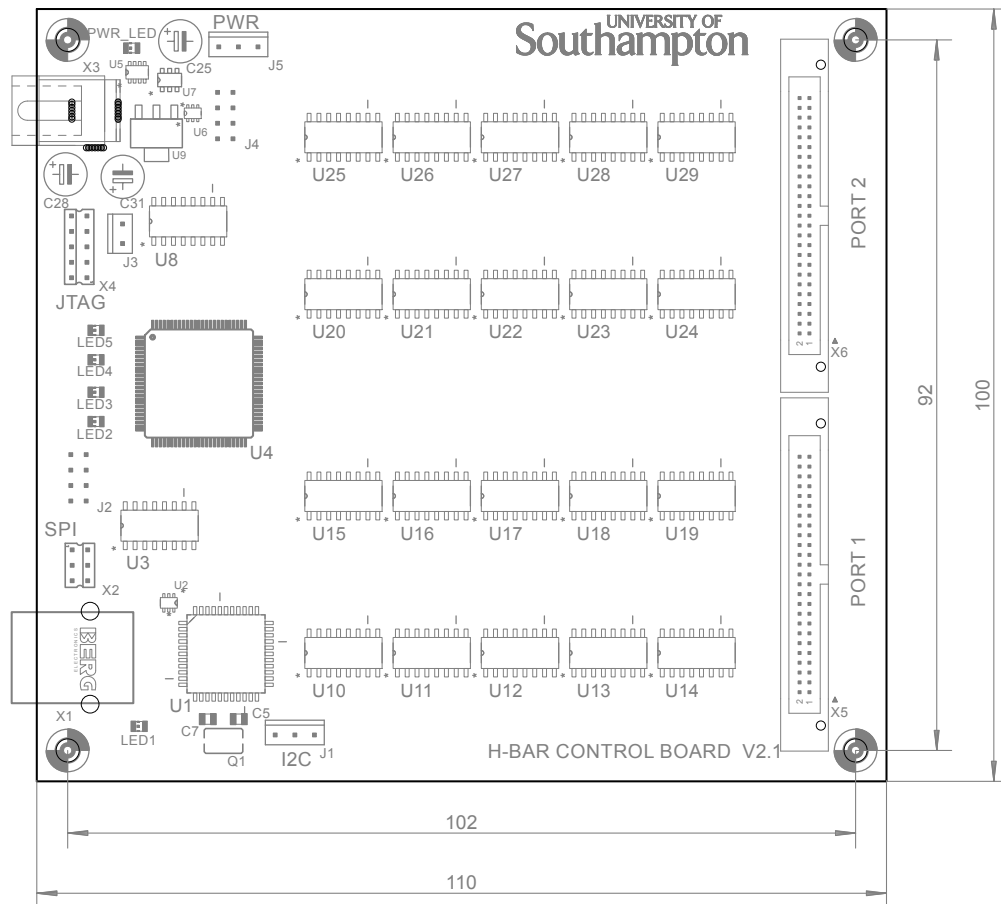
Controller PCB v2.1 dimensions (Top silkscreen layer)
